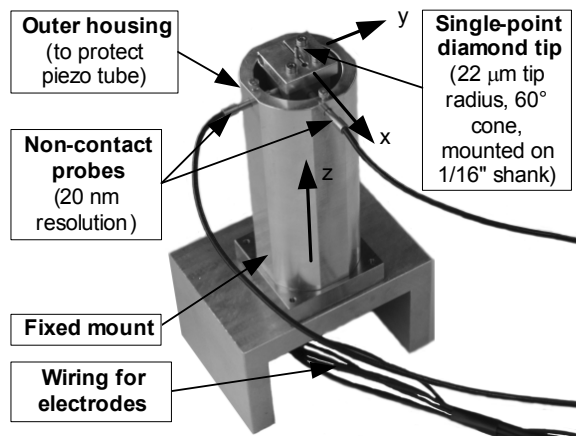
The cutting module prototype consists of the PZT, a housing to protect the tube, a clamp to hold the tool shank, and non-contact probes to monitor the cutting motion.
